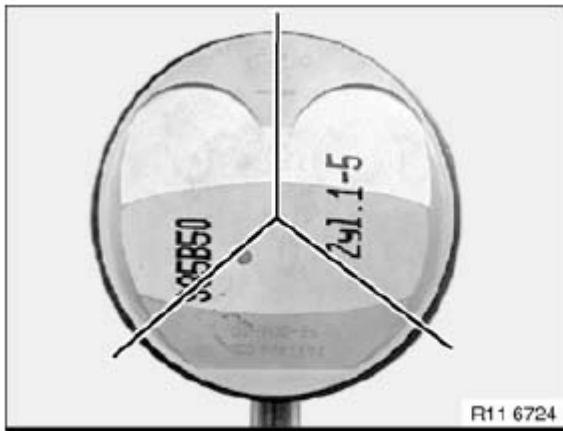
Identifying Piston Ring Contact Point Offset Position
